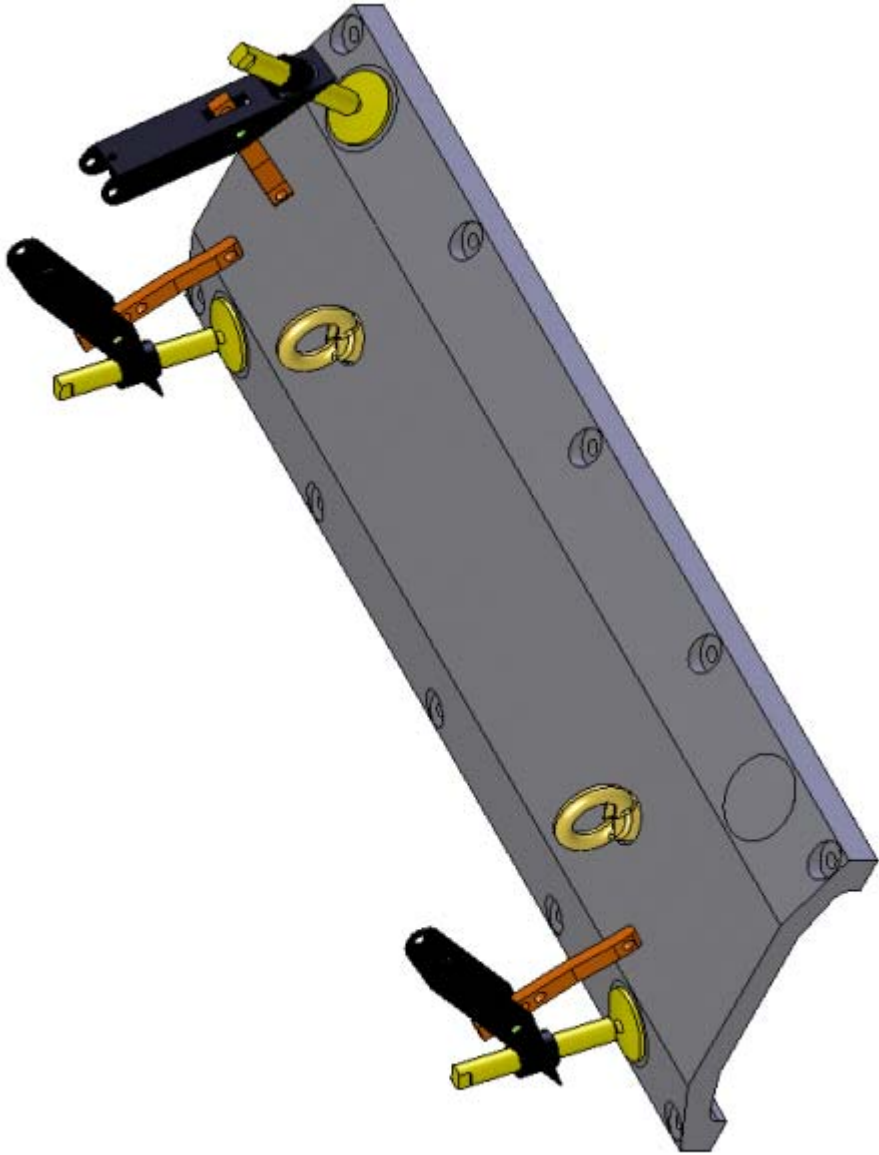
Alignment Component with Three Rocker Arm Assemblies and Eye Bolts
